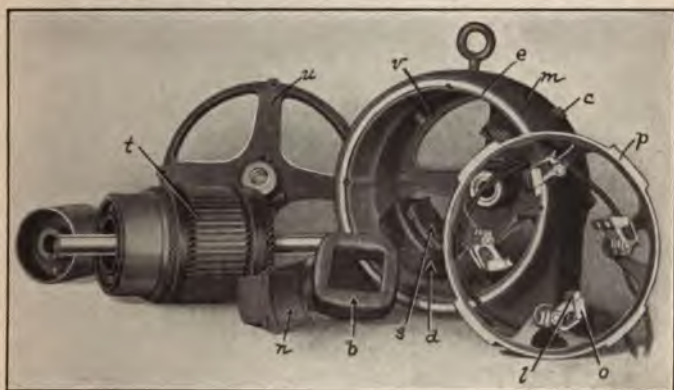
Details of the Sturtevant Four-Pole Motor in Fig. 325.
